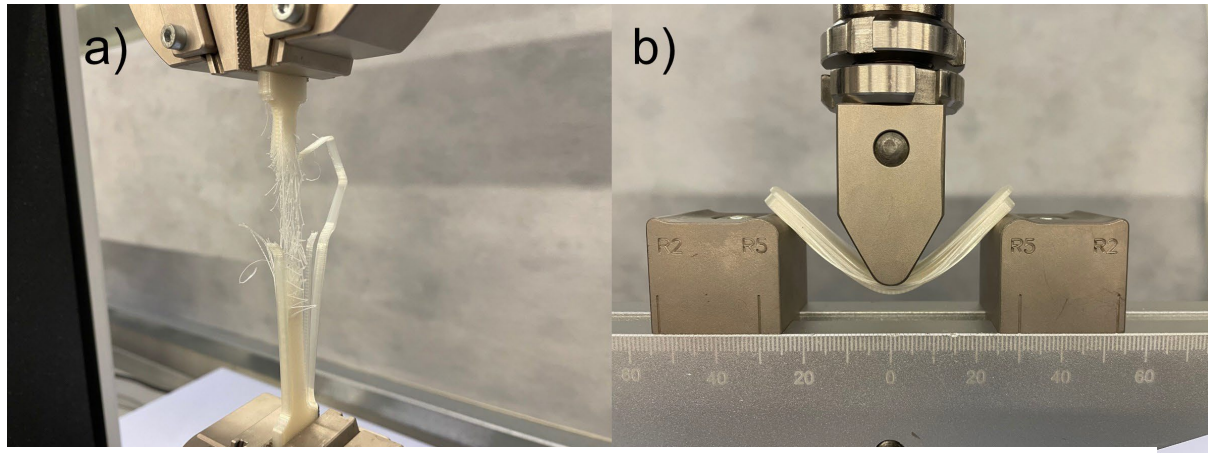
Broken Specimen: a) tensile test specimen VI; b) bending test specimen VI.
